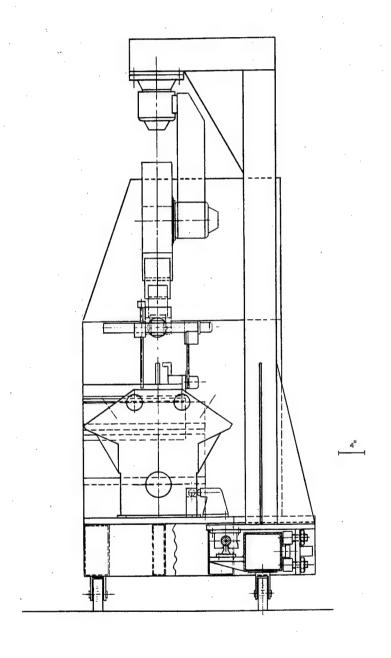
END VIEW OF PROTOTYPE MAG SYSTEM
